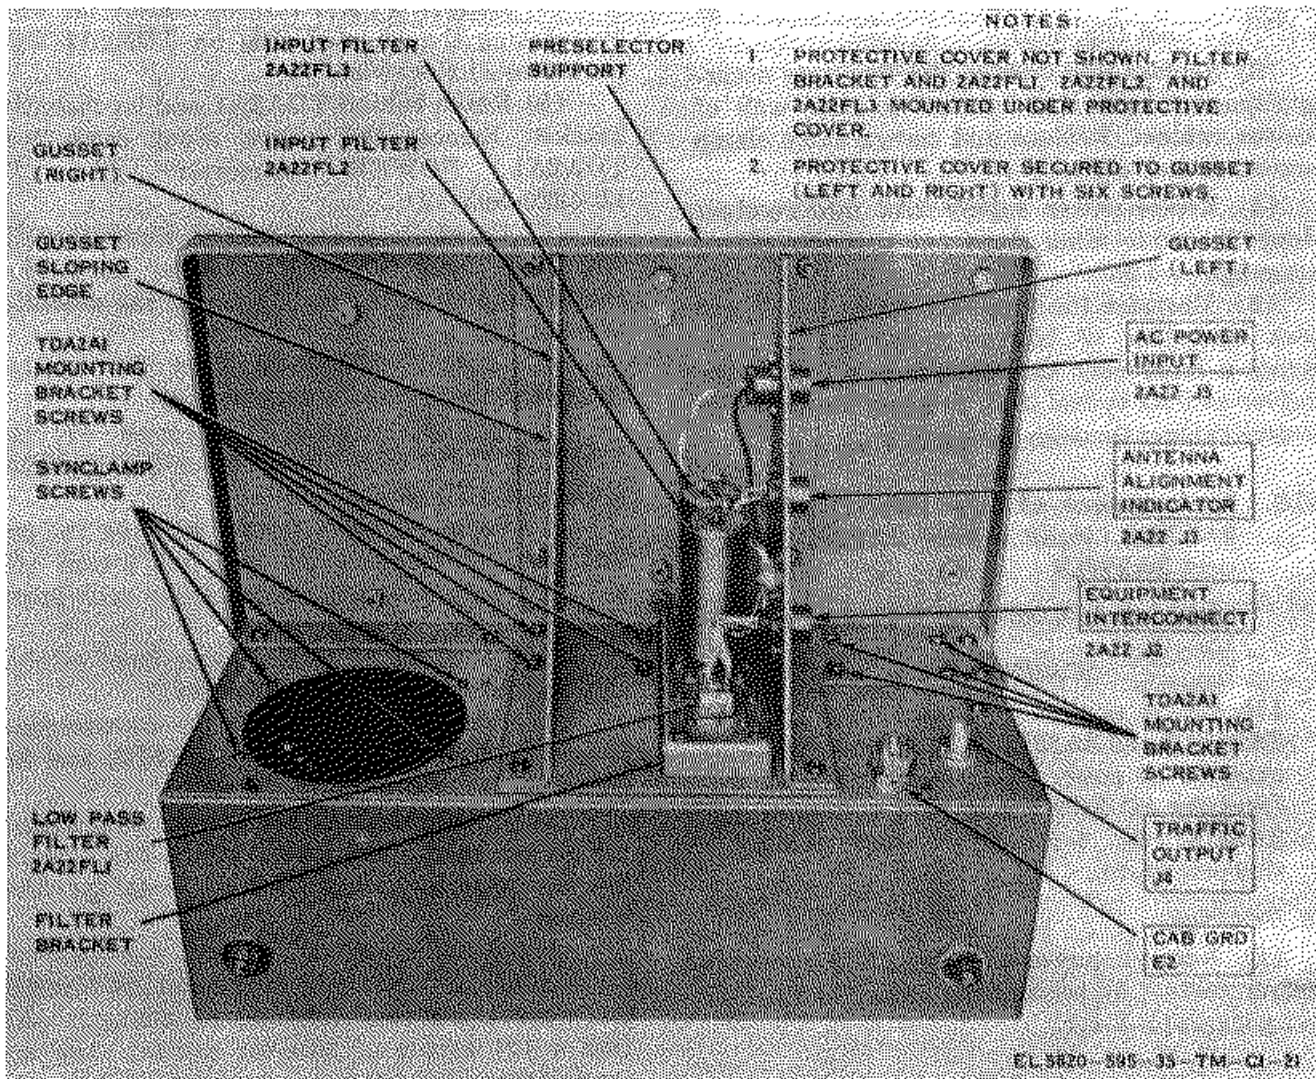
Receiver cabinet 2A22, top rear view, partially disassembled, parts location.
